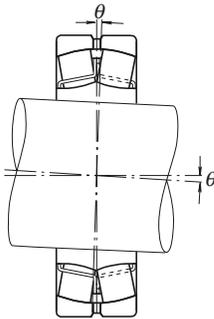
Permissible Misalignment of Spherical Roller Bearings
